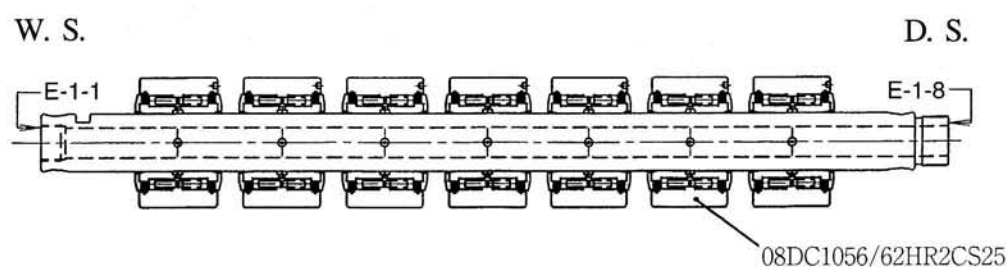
Construction of upper side small-diameter BUR assembly
